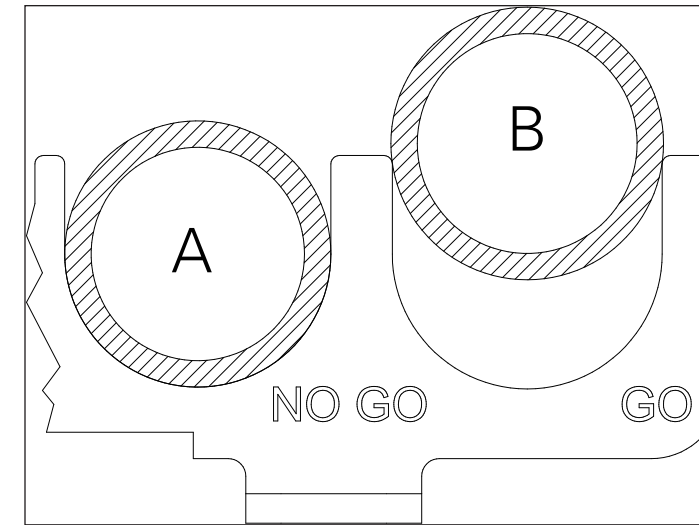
Out of Tolerance Connections: A) Crimped ring fits in "NO GO" slot – ring is undersized; B) Crimped ring does not fit in "GO" slot – ring is oversized.
